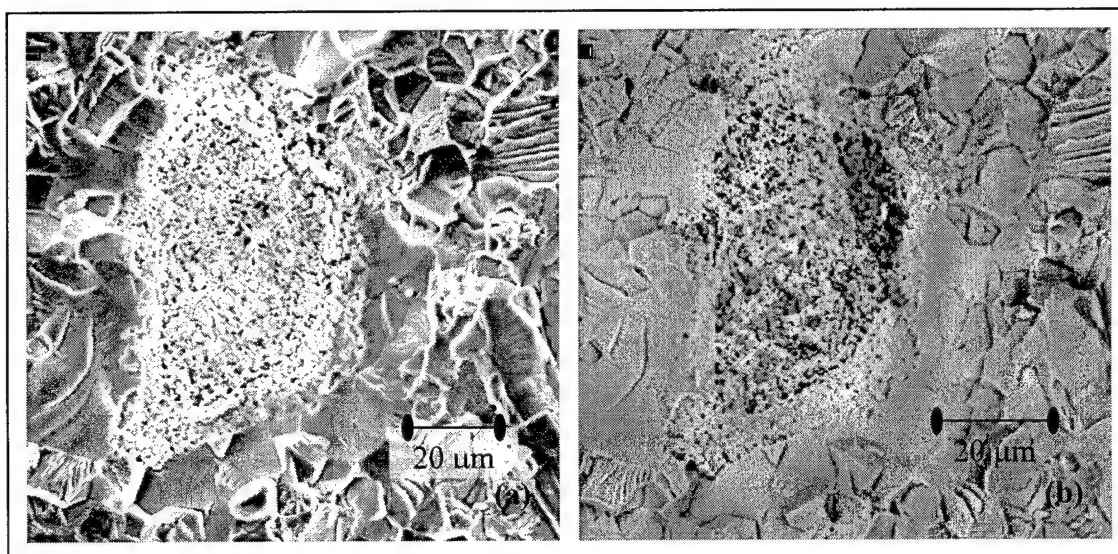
Specimen B3 fracture surface (close-up view of flaw) using (a) secondary (SEM) and (b) backscattered (RBS) electrons. The flaw consists of a calcium, silicon, and magnesium compound.
